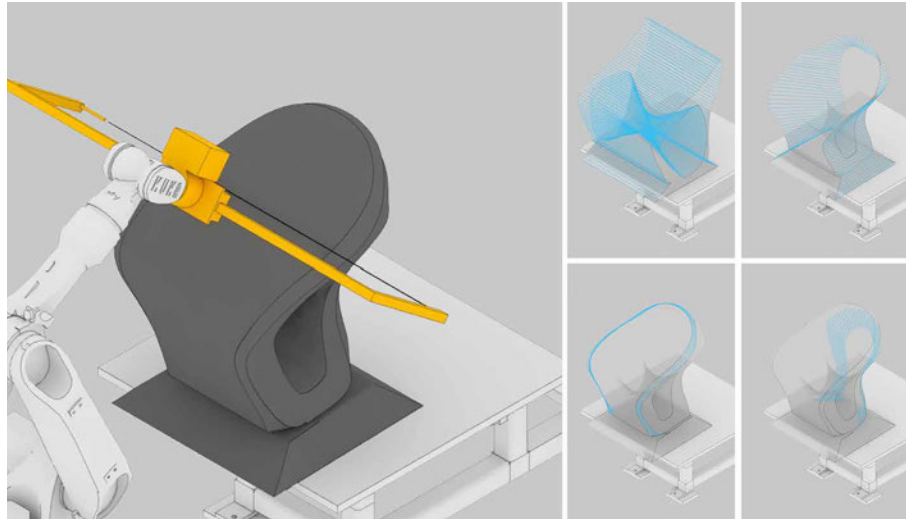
Robotic Hot Wire Cutting of overall form, with only four cuts out of which one side will be milled for more elaborated required details where needed.
